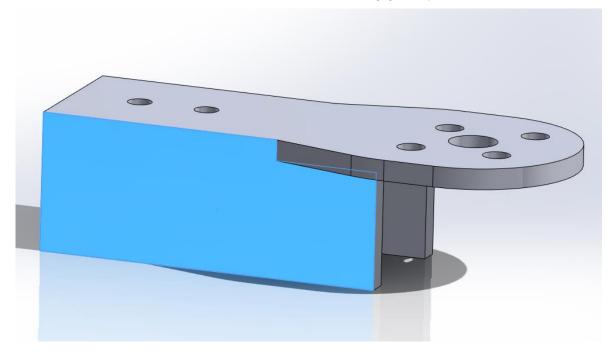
Motor holder CAD model, the side bar is highlighted blue
